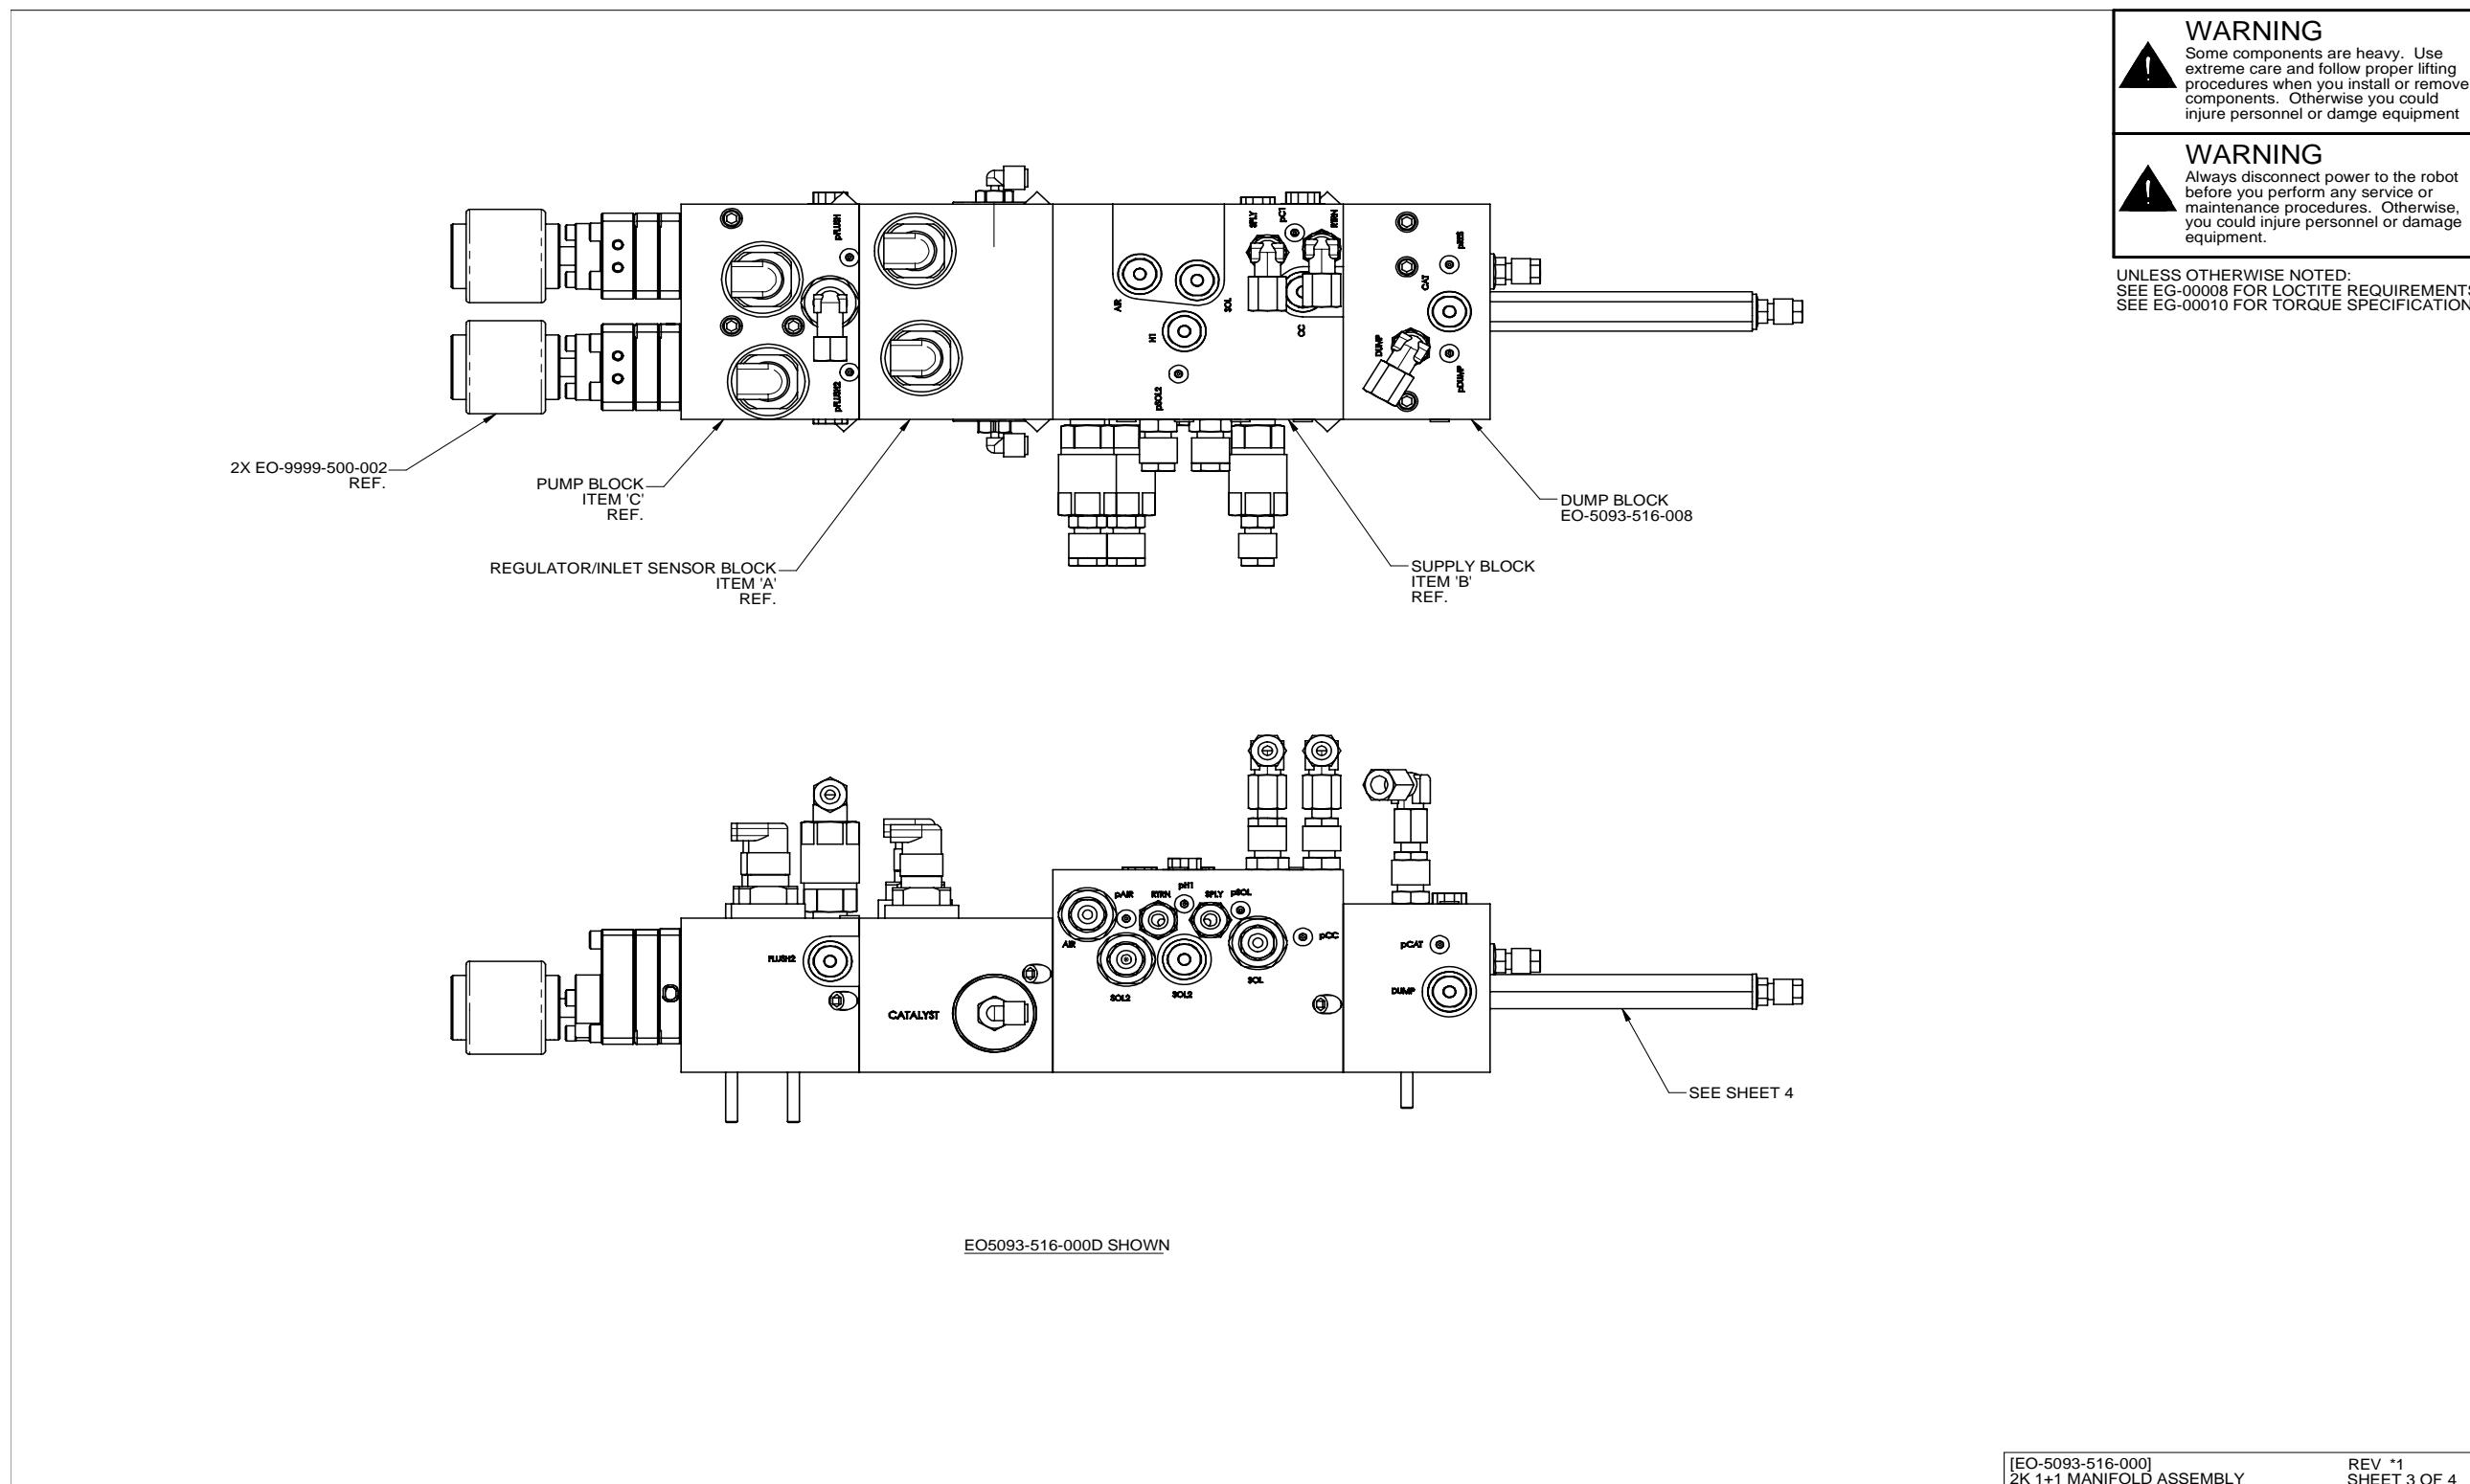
EO-5093-516-000, 2K 1+1 MANIFOLD ASSEMBLY
